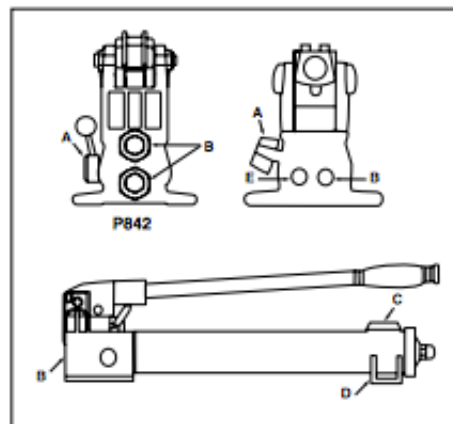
Hydraulic hand pump valves (Enerpac, 2015).
